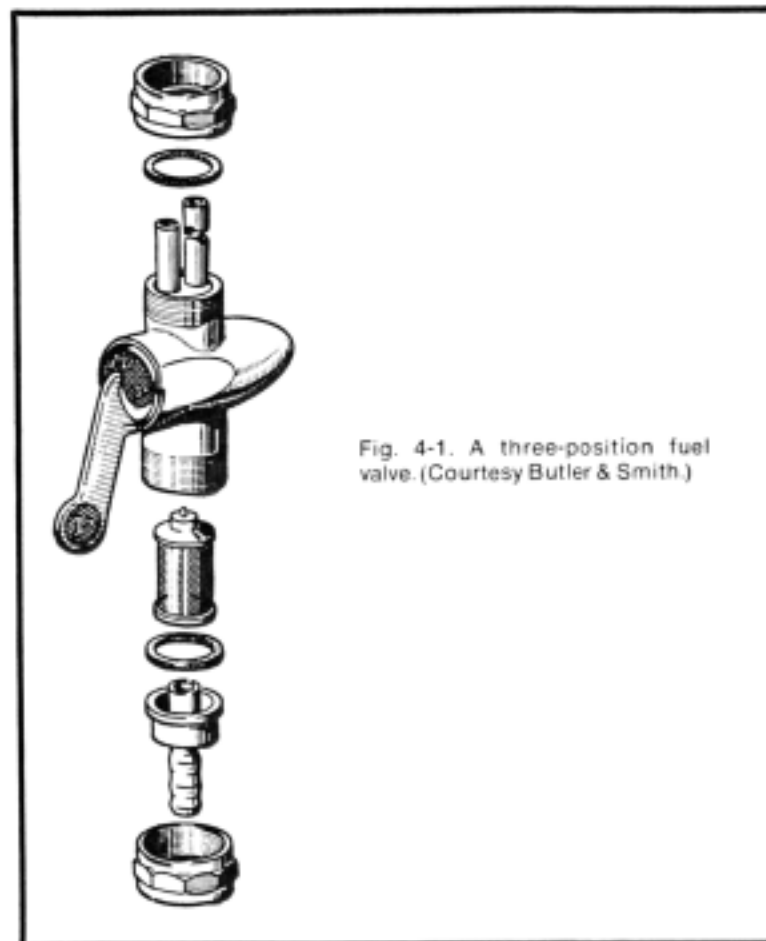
A three-position fuel valve. (Courtesy Butler & Smith.)
